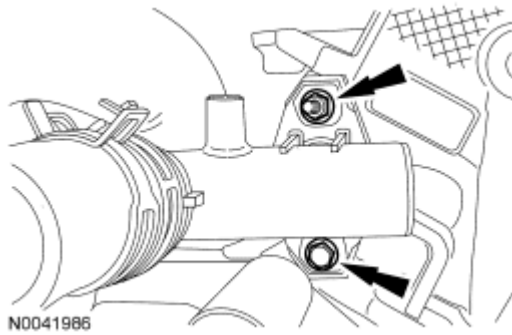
Locating Bolt, Stud Bolt And Coolant Bypass
